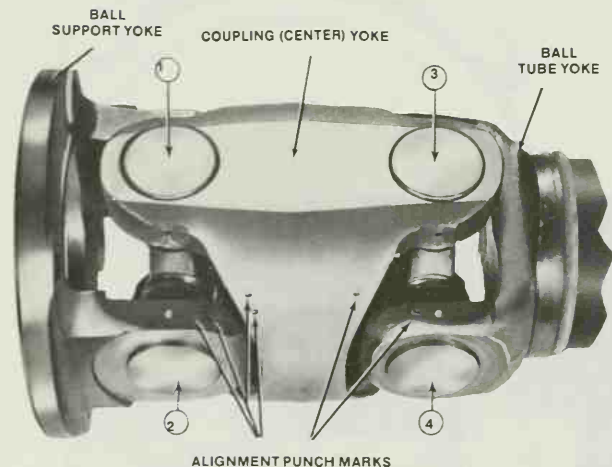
Alignment marks are punched or scribed on yokes prior to disassembly. (Cadillac Motor Car Division of General Motors Corporation)
